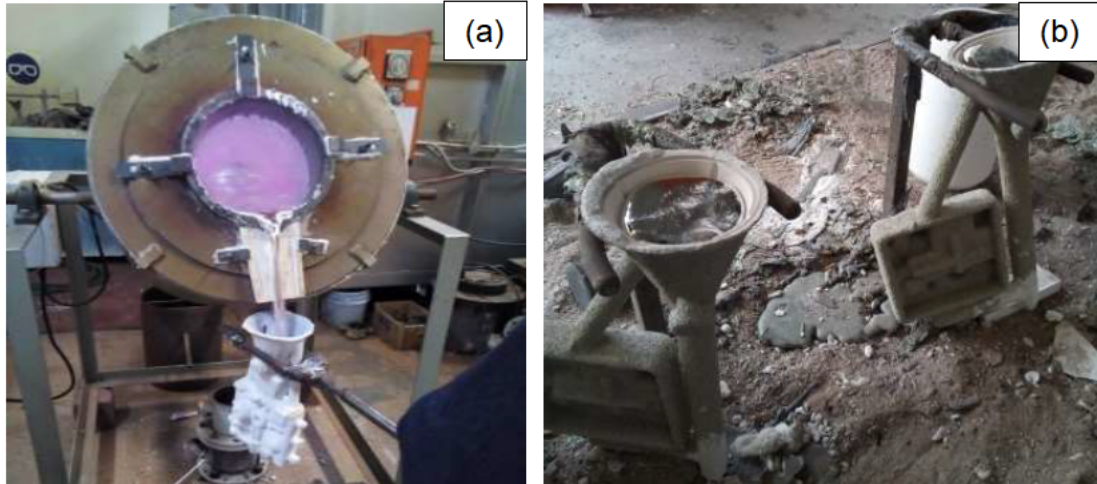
(a) Pouring of the molten metal into the shell and (b) the shell with molten metal left to cool in the air
